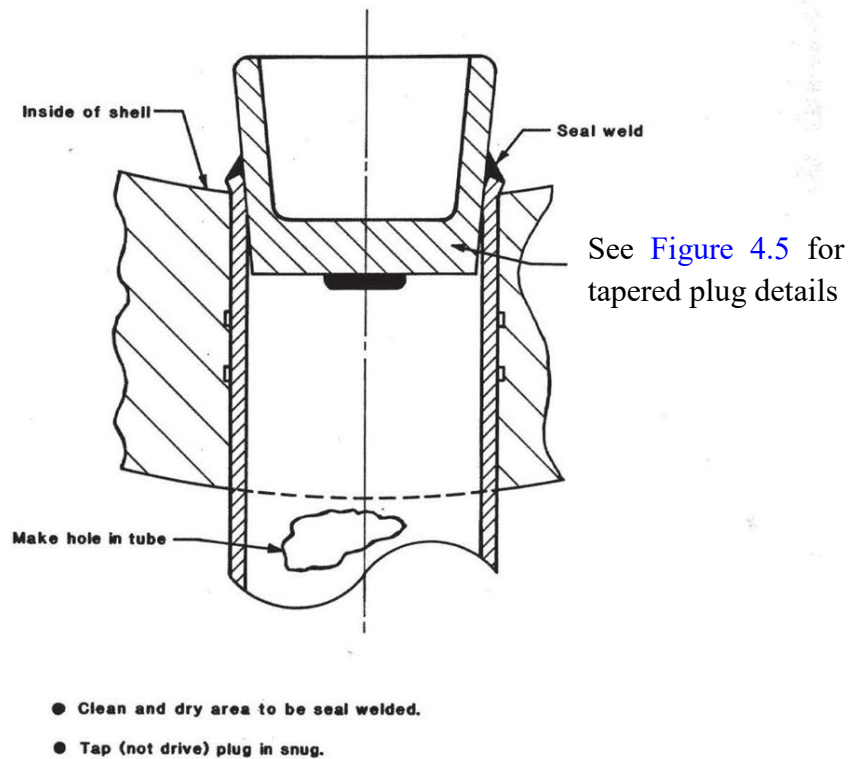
Plugging a Failed Tube with a Tapered Tube Plug
